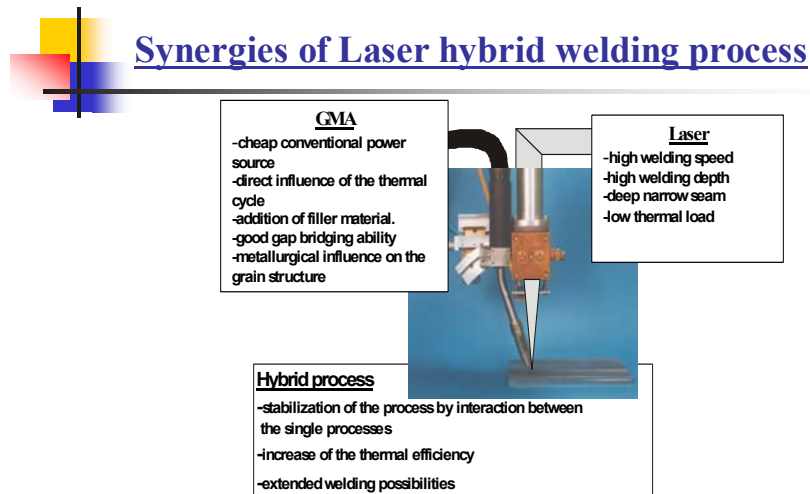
Synergies of Laser-MIG Welding process [5].
